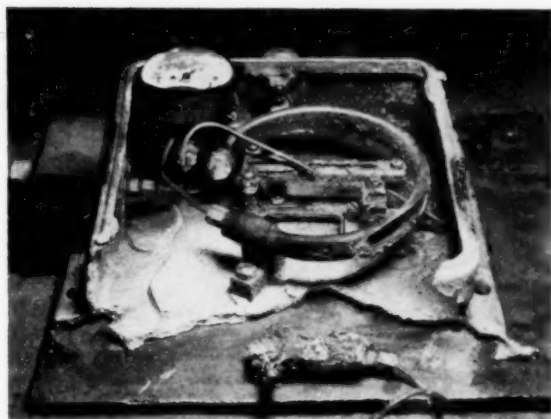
BOURDON-TUBE ASSEMBLY AFTER RUPTURE FROM HYDROGEN PRESSURE OF 12,000 PSIG
